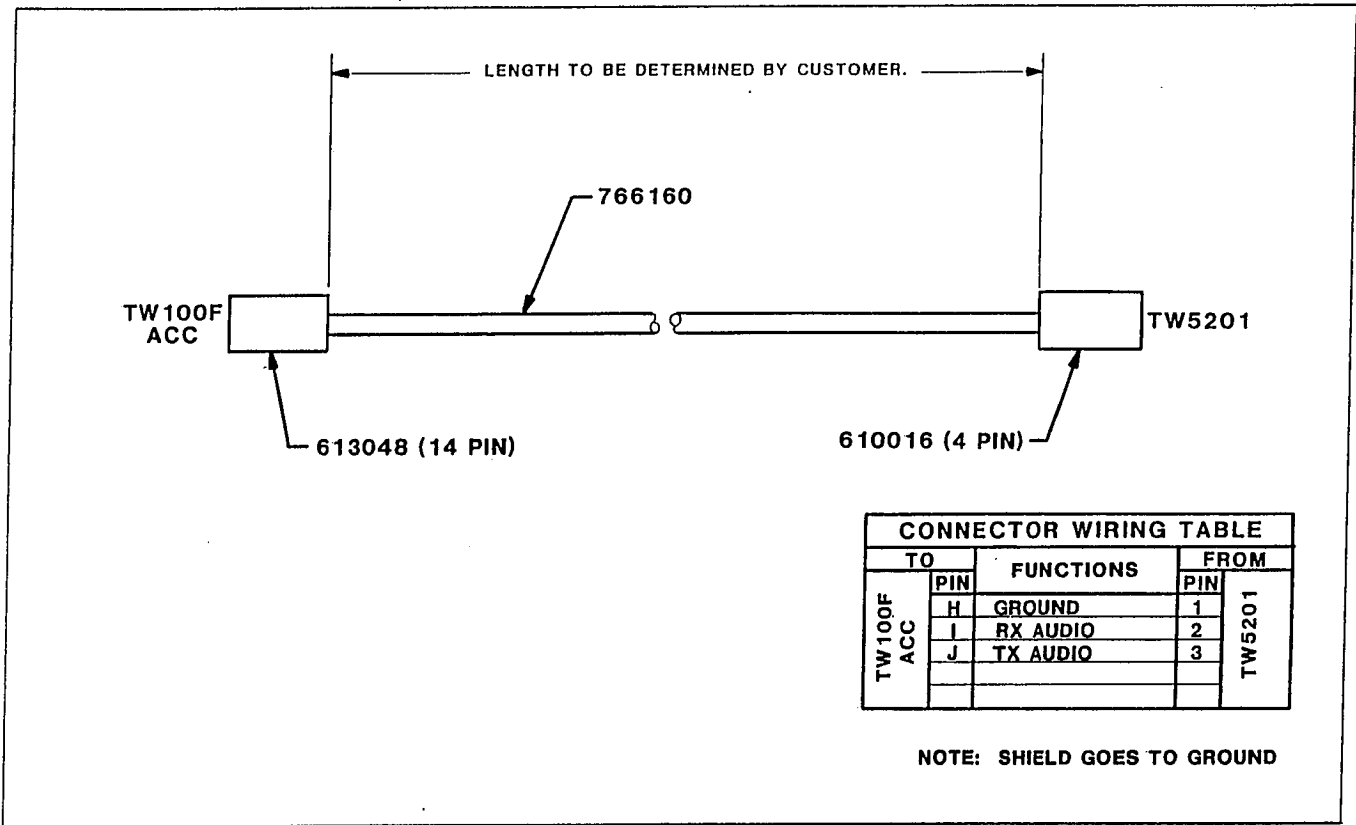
Accessory Cable - TW100F to TW5201 Remote Control.
